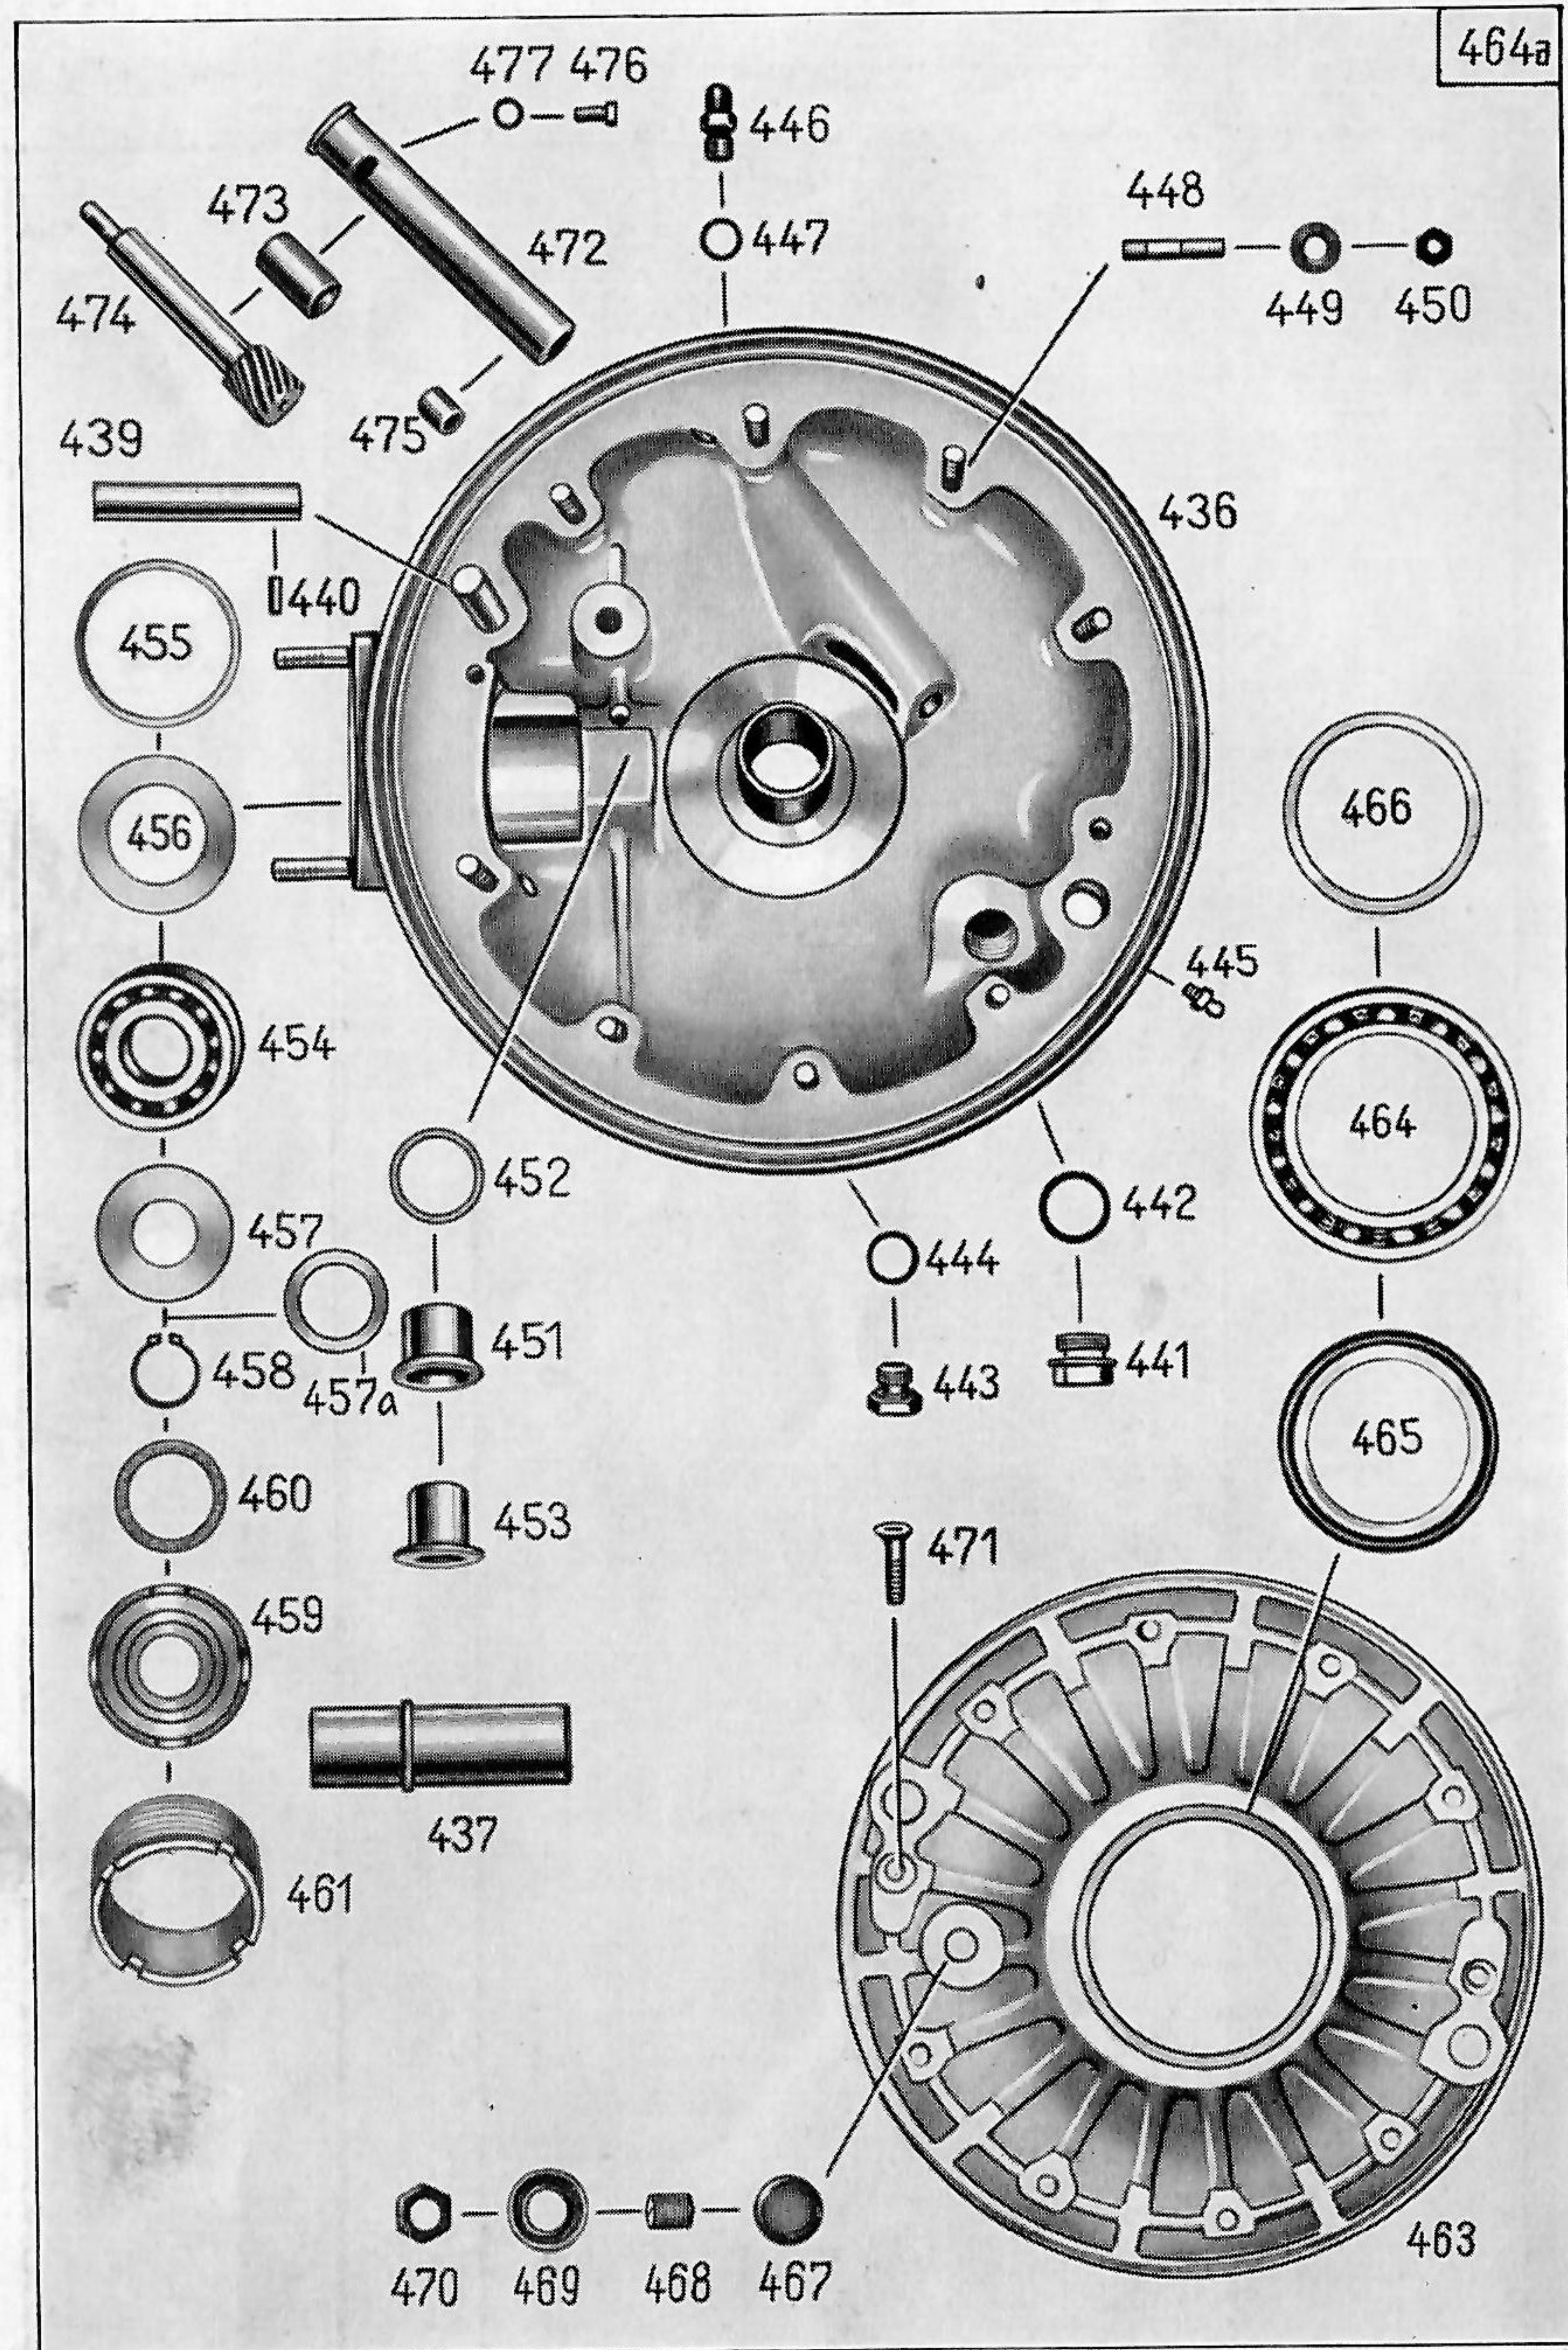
, Group H: a) Rear End Drive Gear Unit (Assembly)
